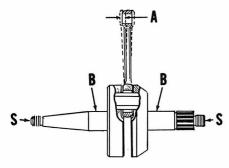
Crankshaft should be supported in lathe centers at (S) to check eccentricity.
